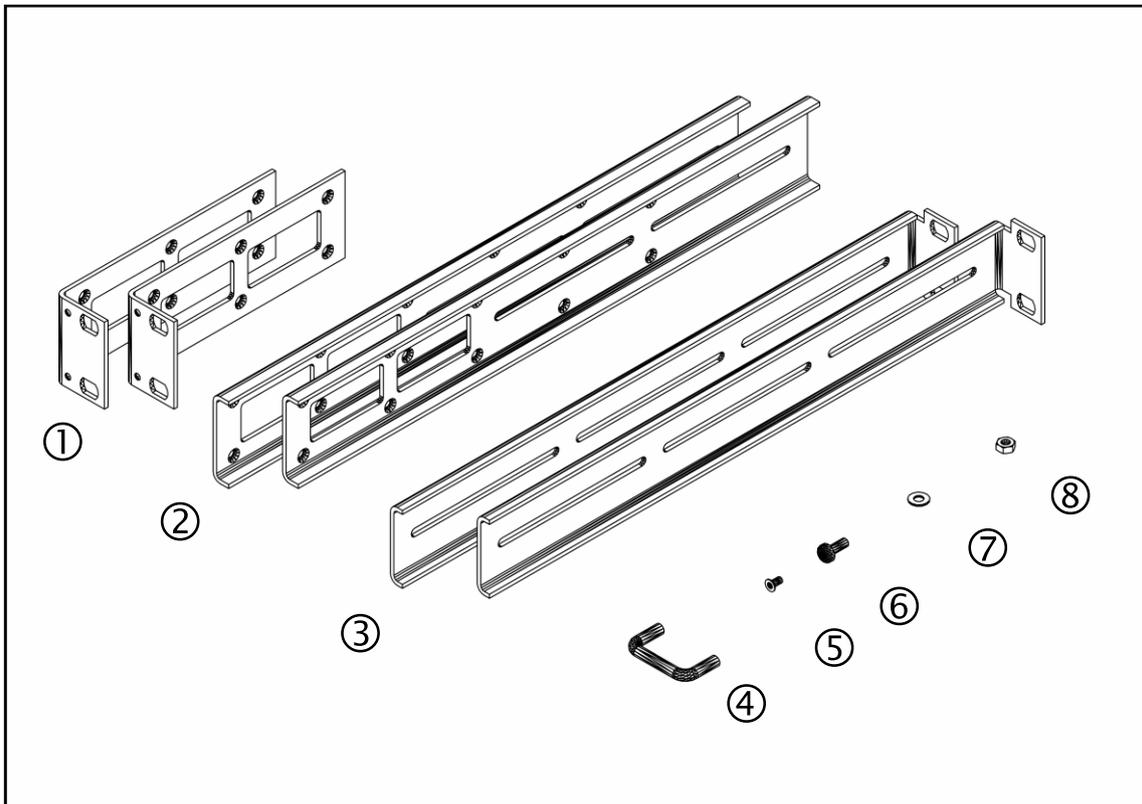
ProDAQ 5725 Rack-mount Kit Parts
